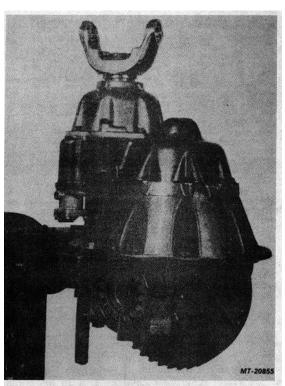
Power Divider and Differential Carrier Assembly Mounted in Rebuild Stand
